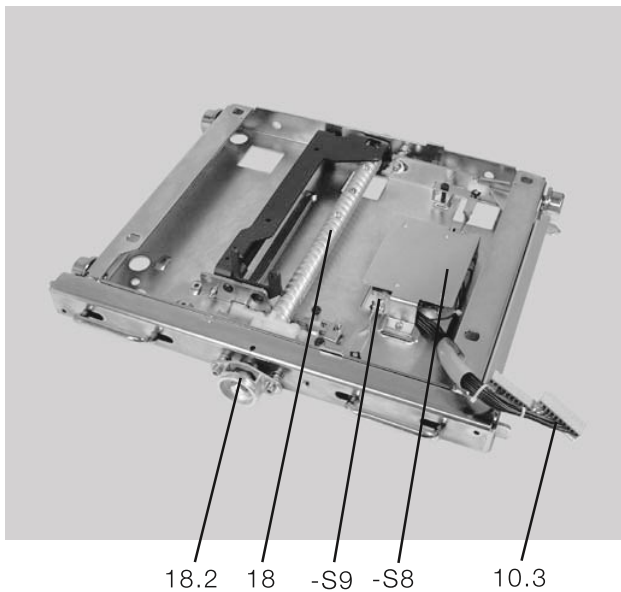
/3: Withdrawable assembly with built-in auxiliary switch (type B, see section 5.5)
